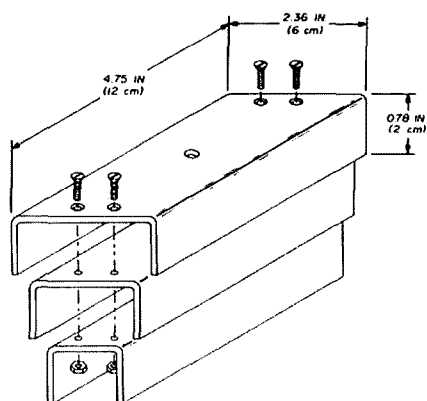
Method of constructing transistor heatsink. Aluminum sheet is formed to approximate dimensions shown, then assembled. Hardware is 4-40 (M3). Top holes are countersunk. Transistor stud clearance is drilled after assembly.
